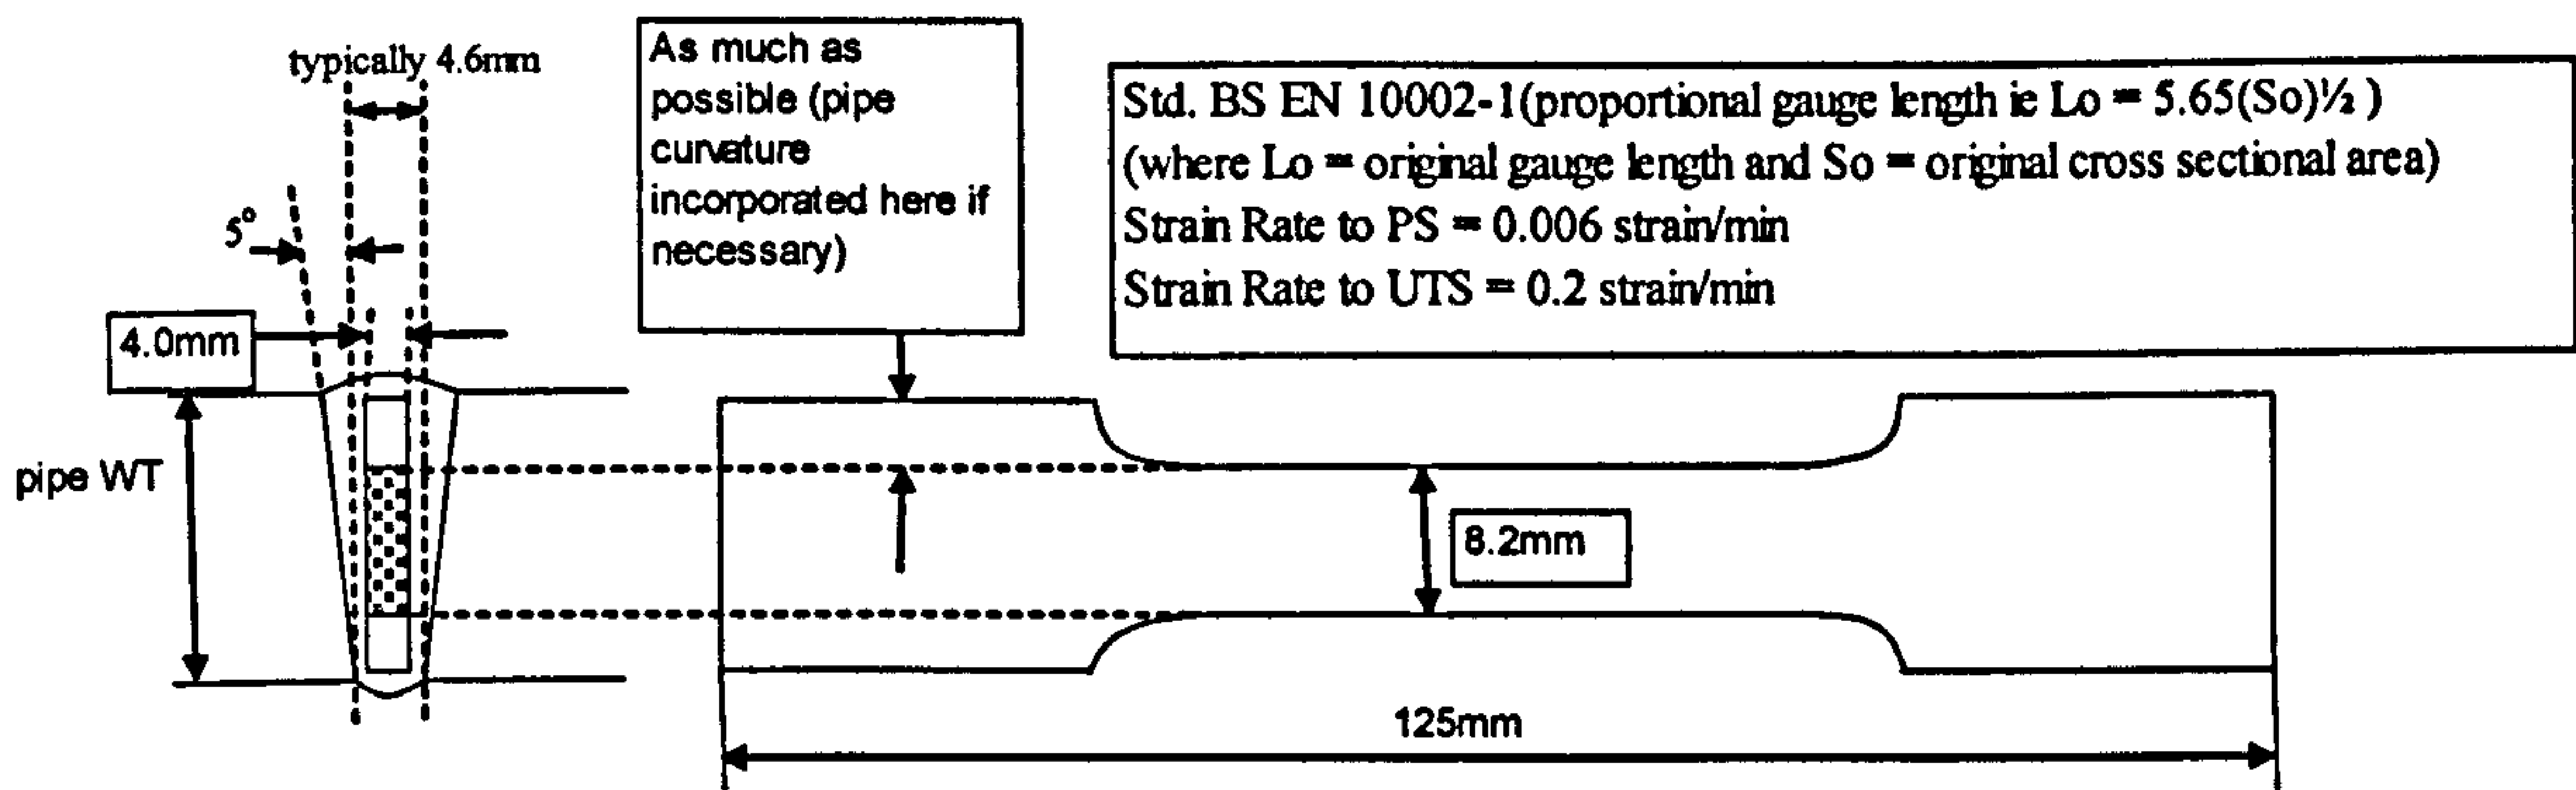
5G Narrow gap all weld metal tensile dimensions/location
